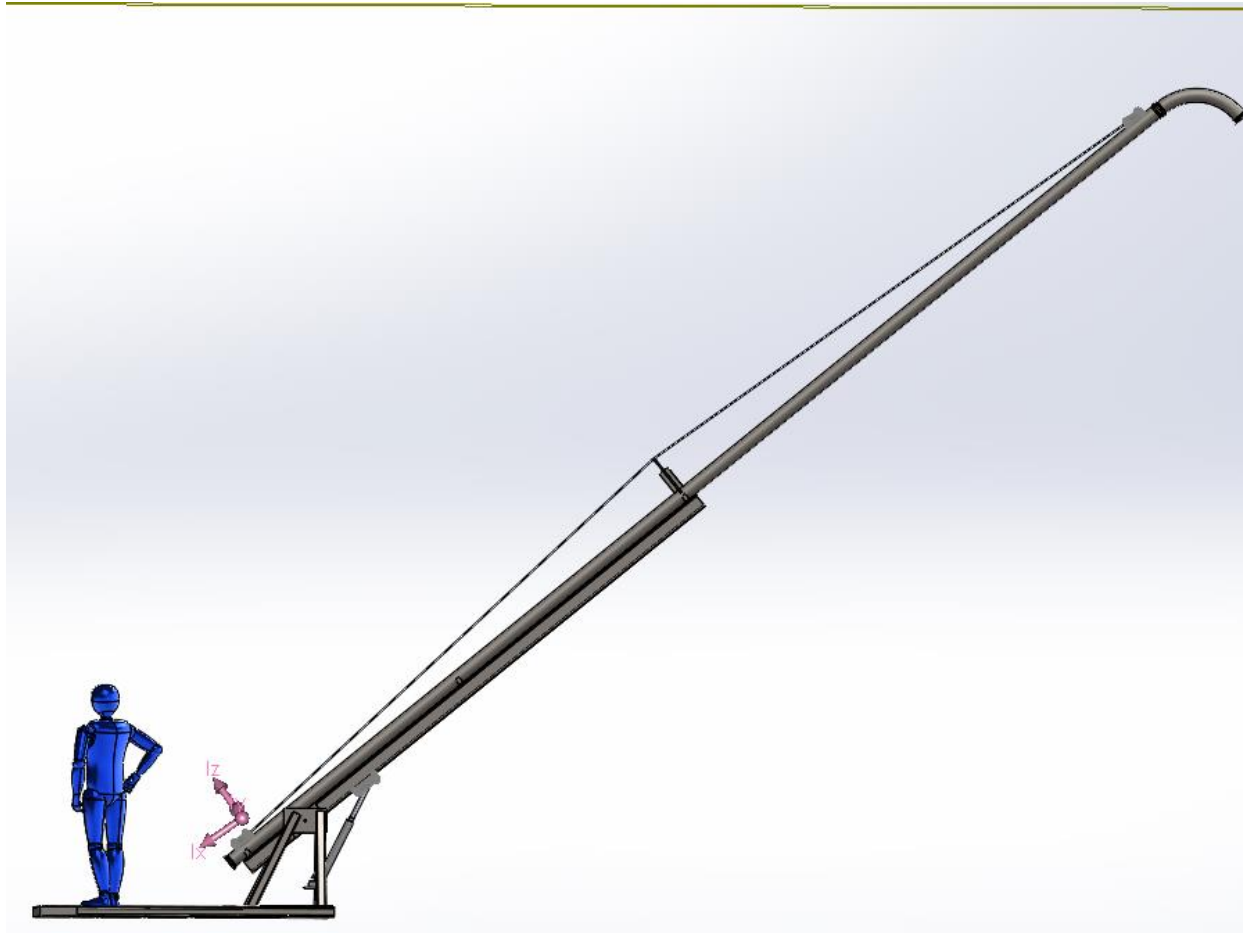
Goose-Neck Grout Delivery Piping for Tunnel Number 2
